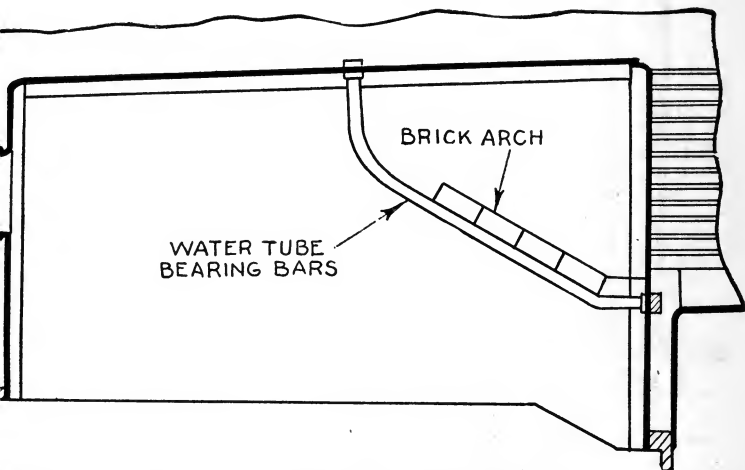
,034.—Locomotive brick arch furnace with water tube bearing bars secured to the tube sheet at one end and to the crown sheet at the other end. The water circulation through these pipes prevents burning out. Fire tiles are placed on top of the bearing bars.
